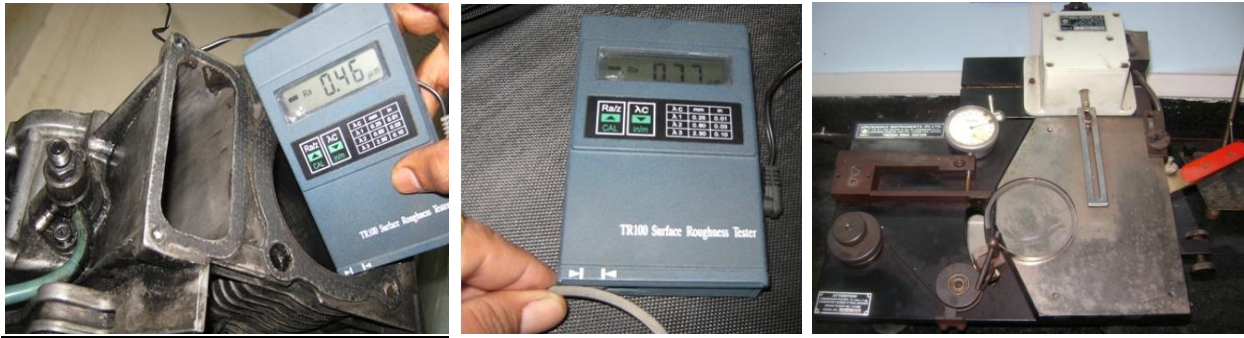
Surface Roughness Test for Cylinder Liner and Piston Ring and Piston Ring Tension Tester
